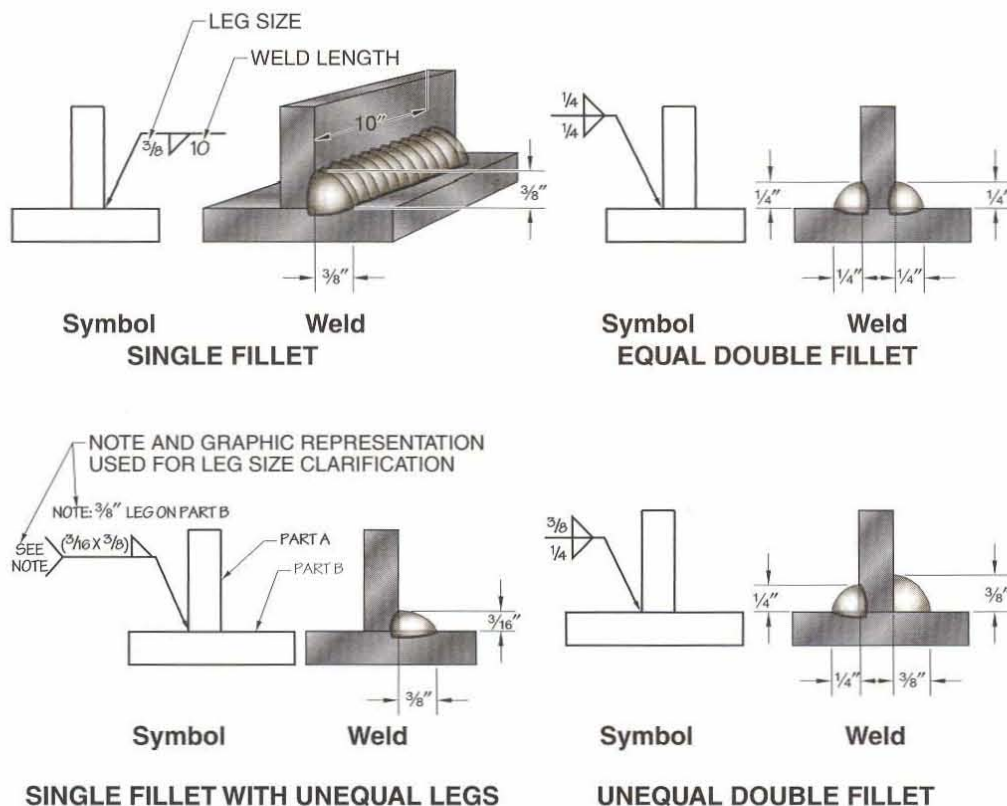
The leg size (width) of the fillet weld is expressed as a fraction, decimal, or metric unit to the left of the weld symbol. The length is indicated by the actual numerical value to the right of the weld symbol.
